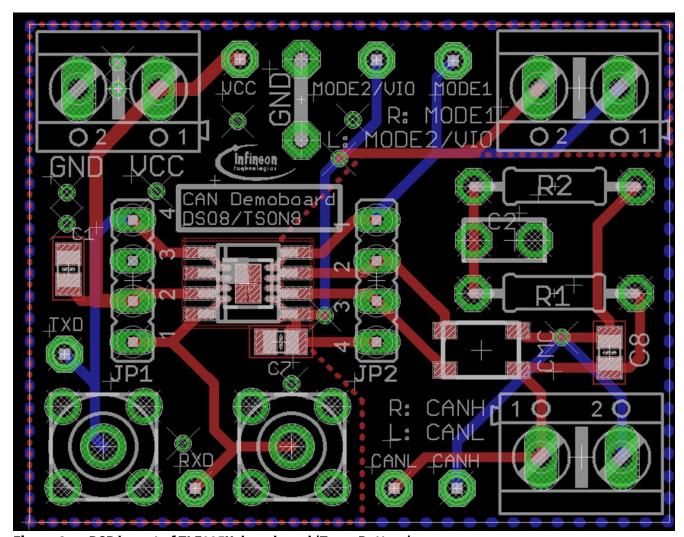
PCB layout of TLE925X demoboard (Top + Bottom)
